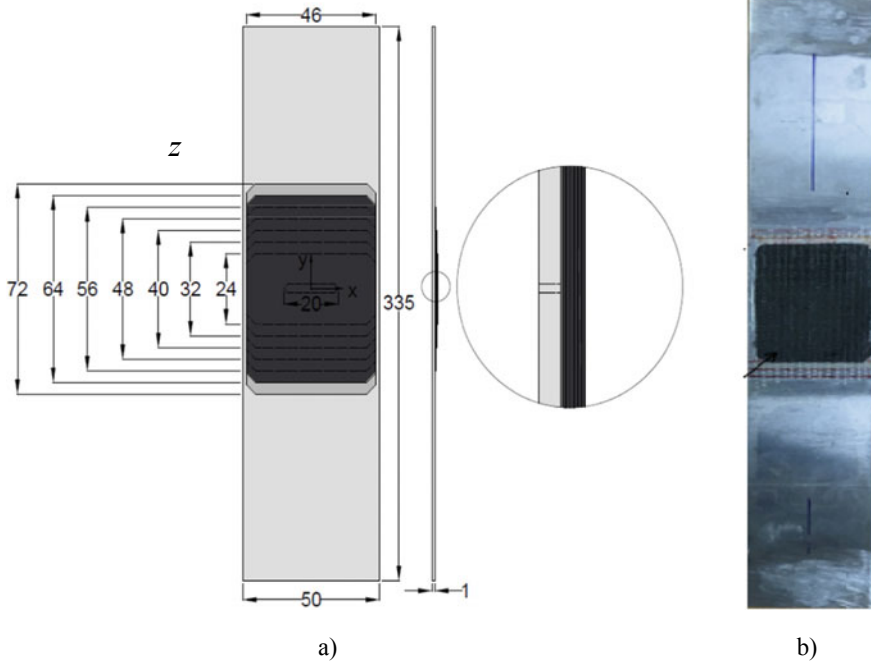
The 6-ply patch specimen: a schematic view and b FRP patch on the skin
